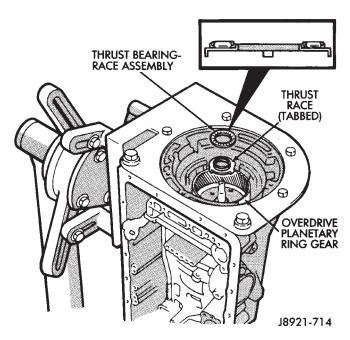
Installing Ring Gear Thrust Bearing And Race
